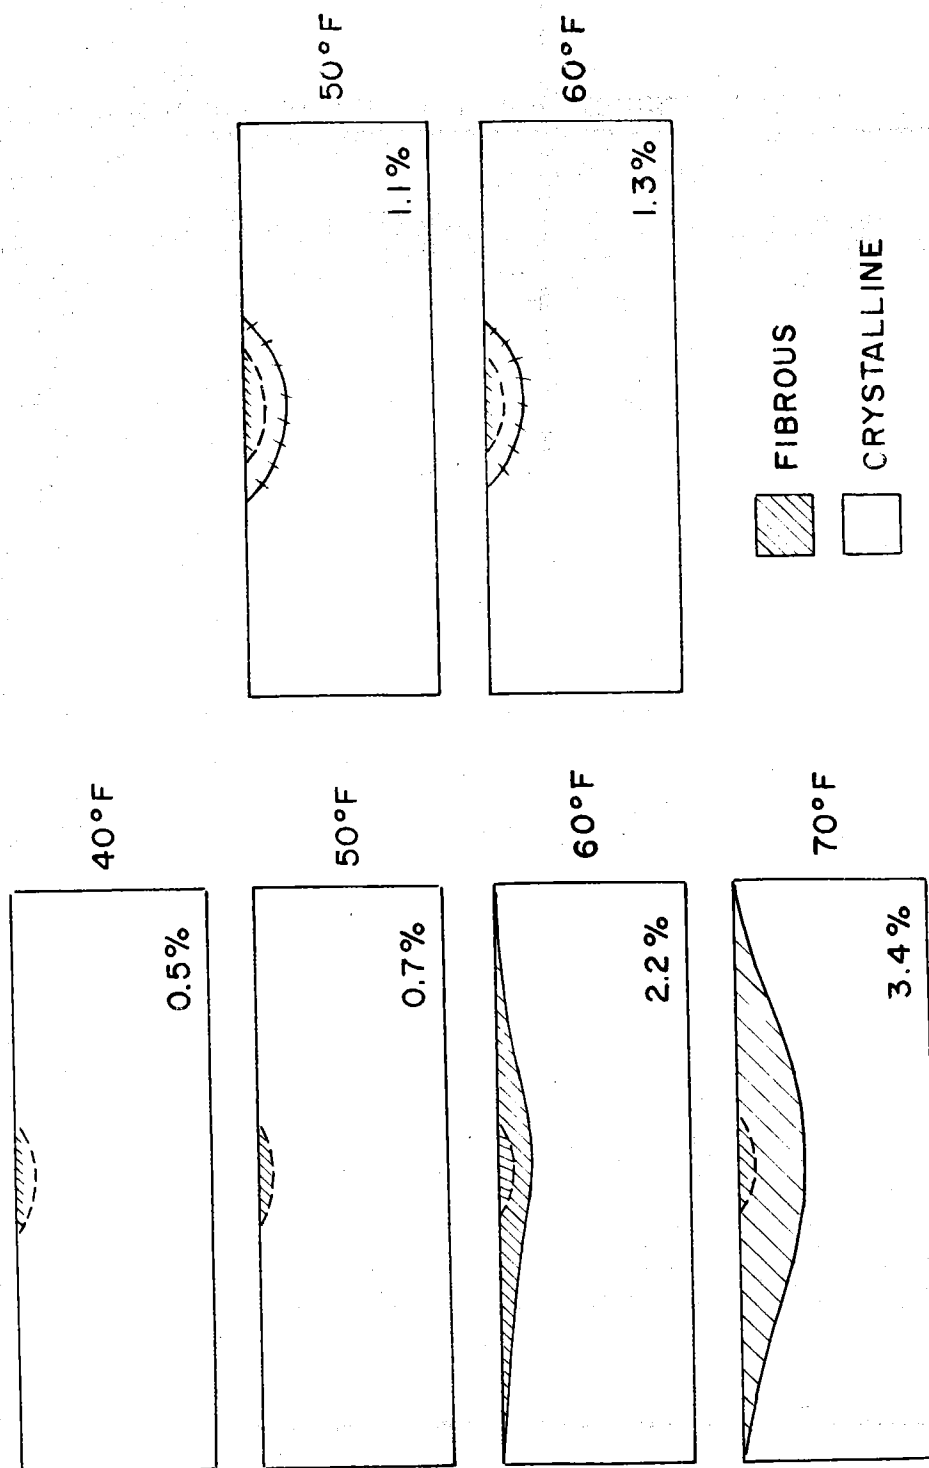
Fracture Behavior of Kinzel Specimens of A-7 Steel Welded with E8010 Electrodes and Postheated.
